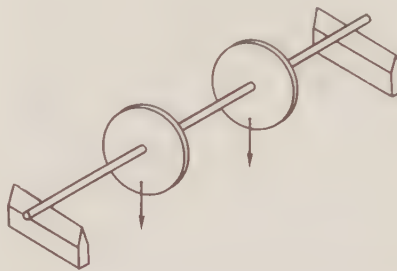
An assembly which is statically unbalanced mounted on knife edges.
